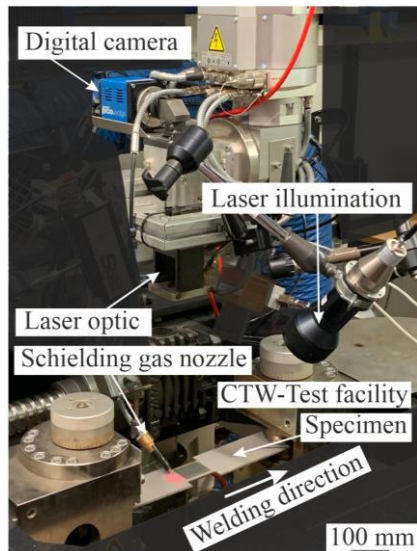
Experimental setup for CTW-testing of LMD coated specimen
